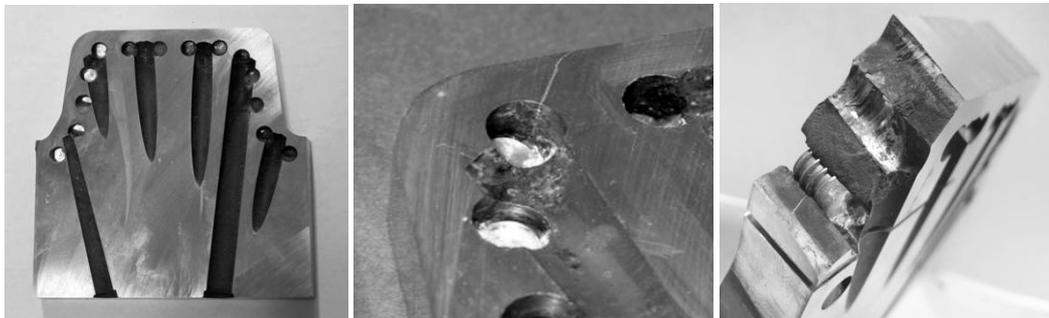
Corrosion induced crack from a cooling channel to the working surface of a hot-stamping tool
